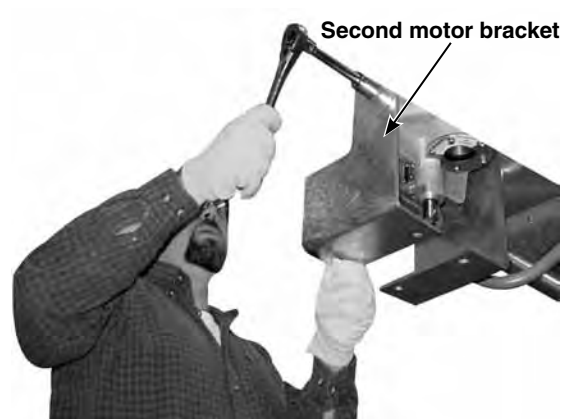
If motor operators are furnished, place the second motor bracket on the opposite side between the pole-unit base and the second mounting bracket.
